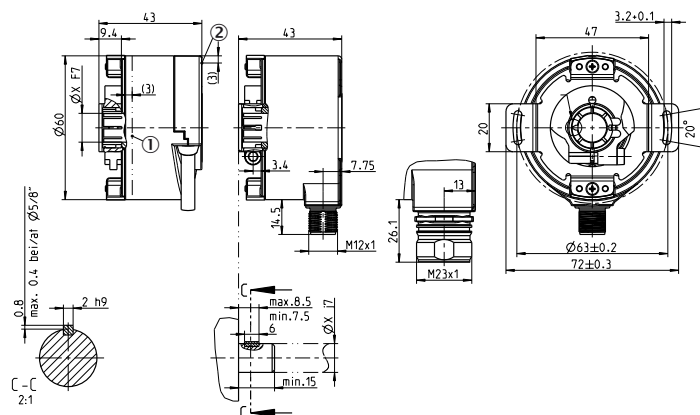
Dimensional drawing of blind hollow shaft with cable outlet, M12 or M23 male connector (all dimensions in mm)
